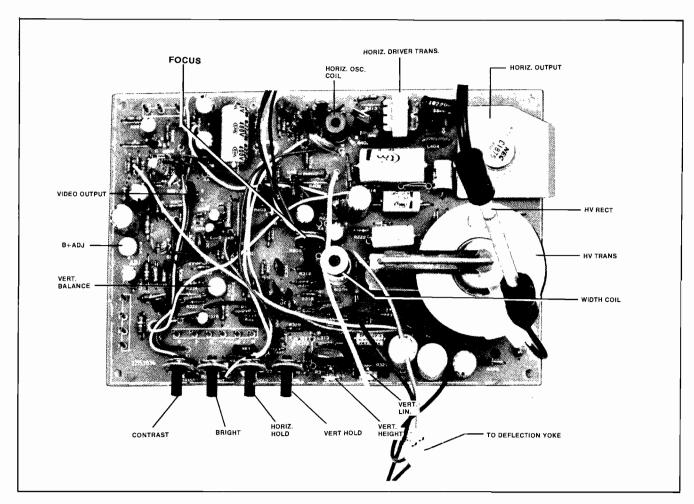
TEC Monitor Printed Circuit Board, Top View
